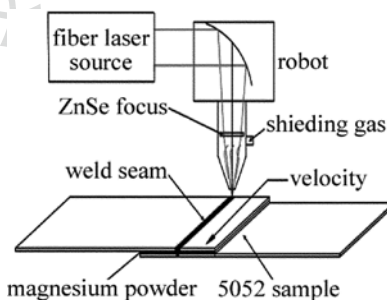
Method of filling magnesium powder and welding schematic diagram
